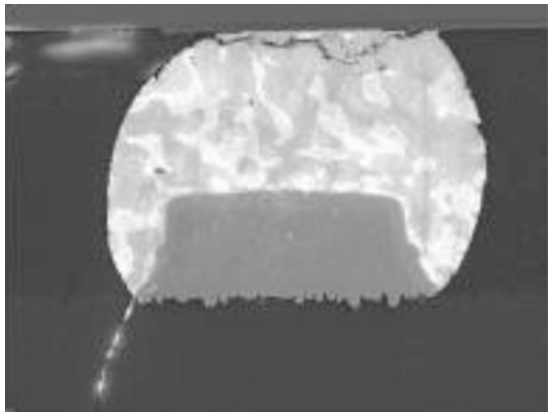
Fatigue cracks at the flip-chip interface
